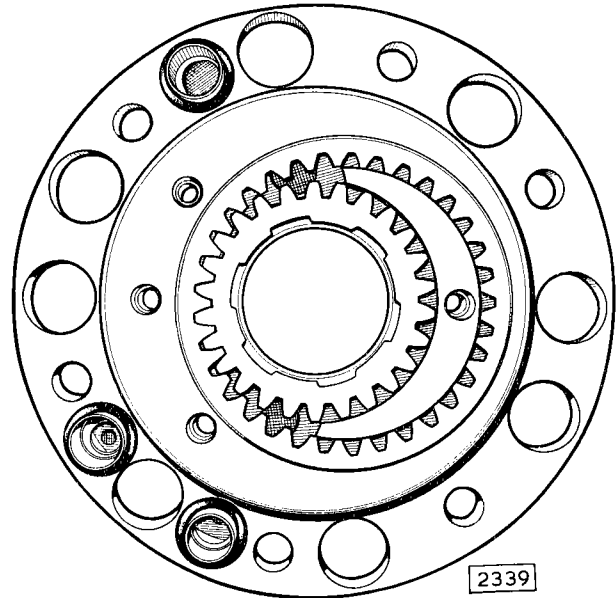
Rear view of the oil pump showing the relative positions of the three rubber "O" rings and spigots
